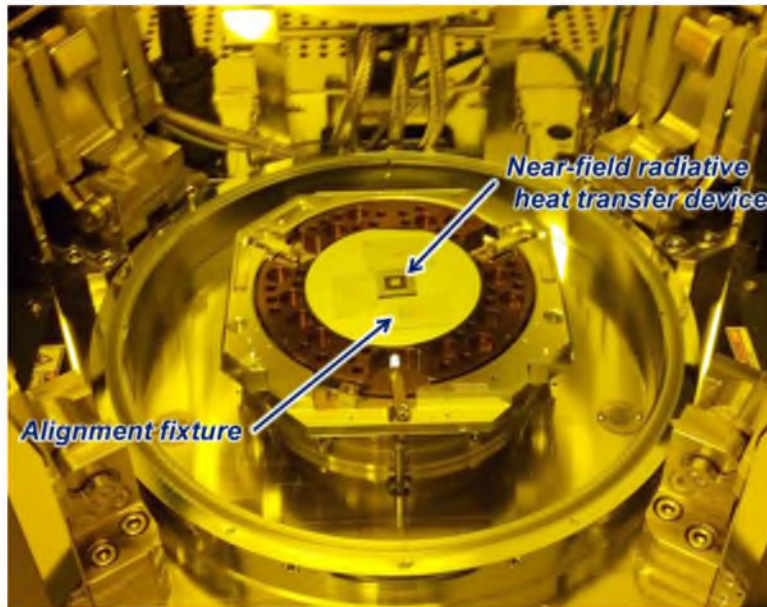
Interior of the EVG 520 IS wafer bonder. A custom-fabricated fixture was employed to ensure proper alignment of the top and bottom Si substrates.
